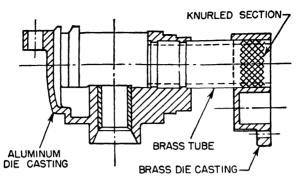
Brass and aluminum die-cast assembly. First the brass section is cast with a tubular brass insert; then the other end of the tube is cast in with the aluminum section. The part is an outboard-motor gear-case head.
